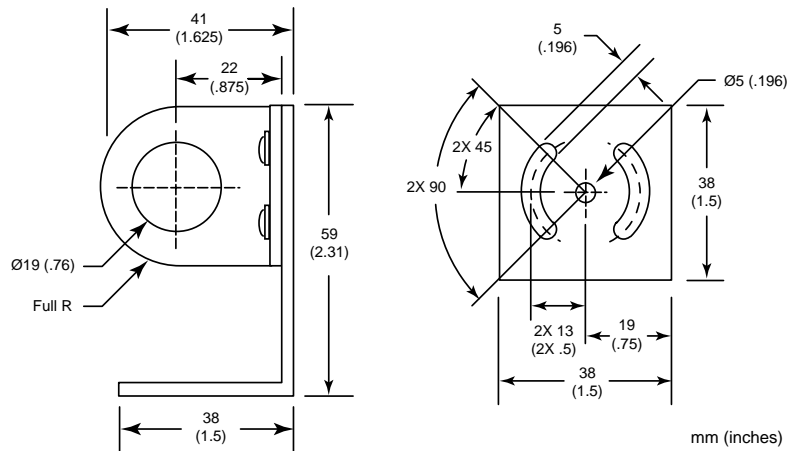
Adjustable Mounting Bracket for Sensing Head
